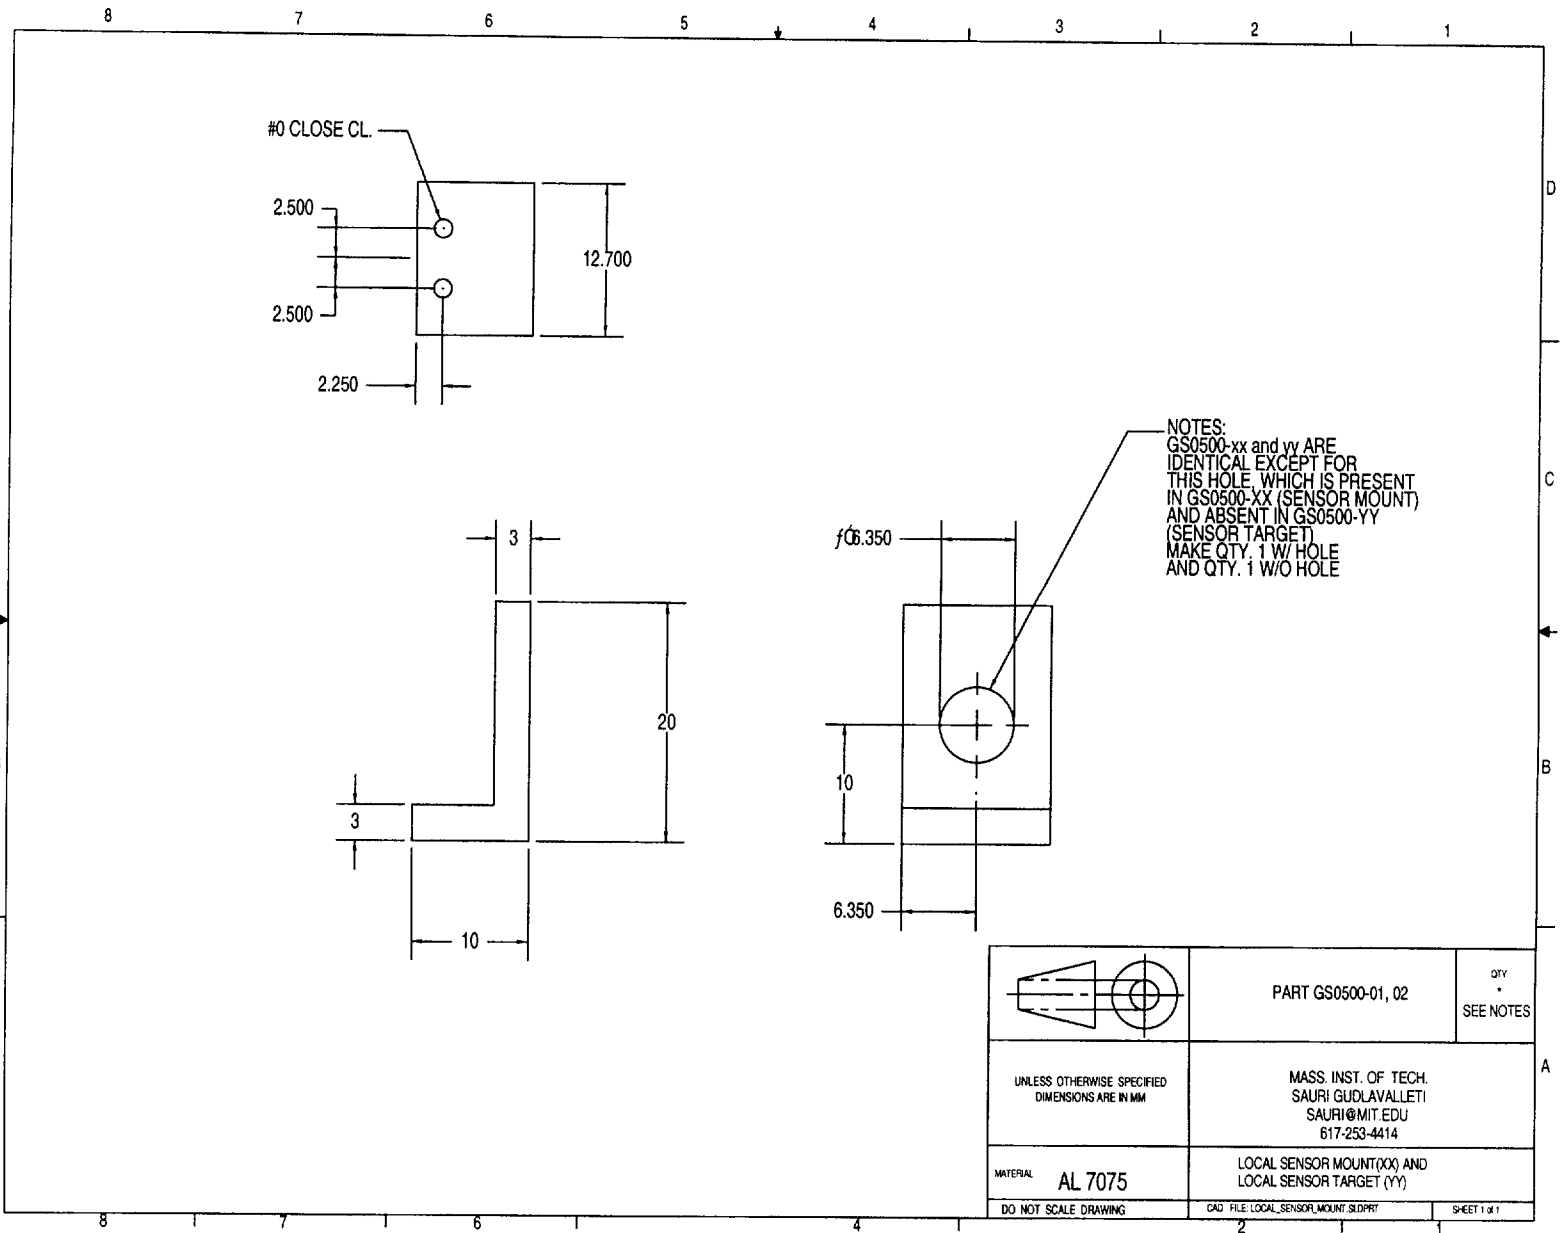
Part GS 0500-01 and 02. Fixtures to mount displacement sensors locally on the specimen stages, for example, in the multispin bend fixtures, when the fixture blocks the designated sensor mount. Ref. Fig. 4-6 for an assembly drawing.
